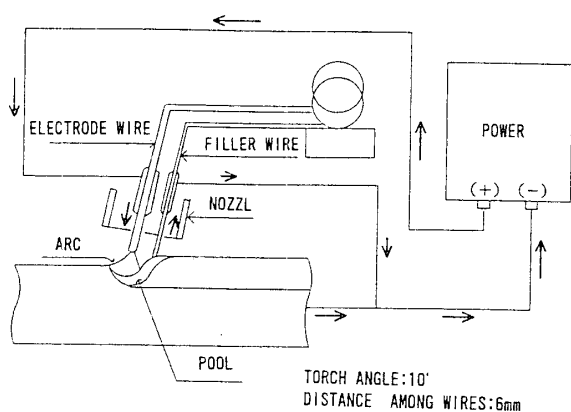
Schematic Drawing of Double Wire MIG Welding Process
